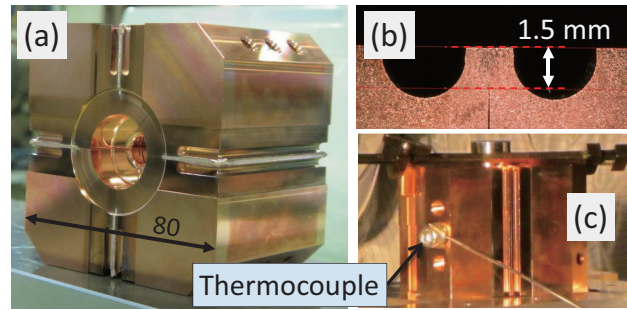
EBW of the quadrants. (a) After the EBW. (b) Welding penetration depth for the EBW conditions described in [13]. (c) A thermocouple is attached.
